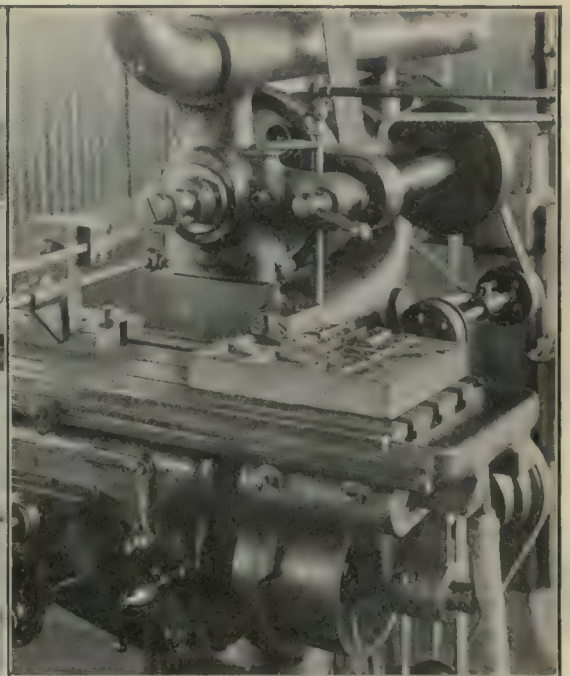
MILLER WITH CAM-OPERATED TABLE FOR CUTTING-OFF WORK
